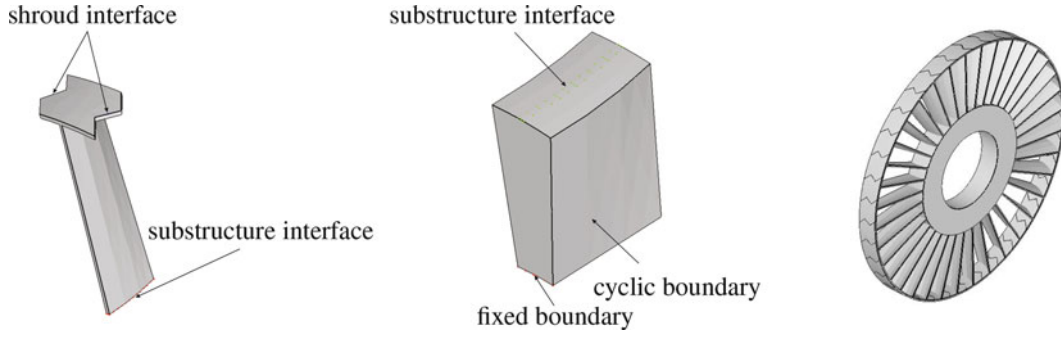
Blade-, disk-components and assembly of the finite-element model
